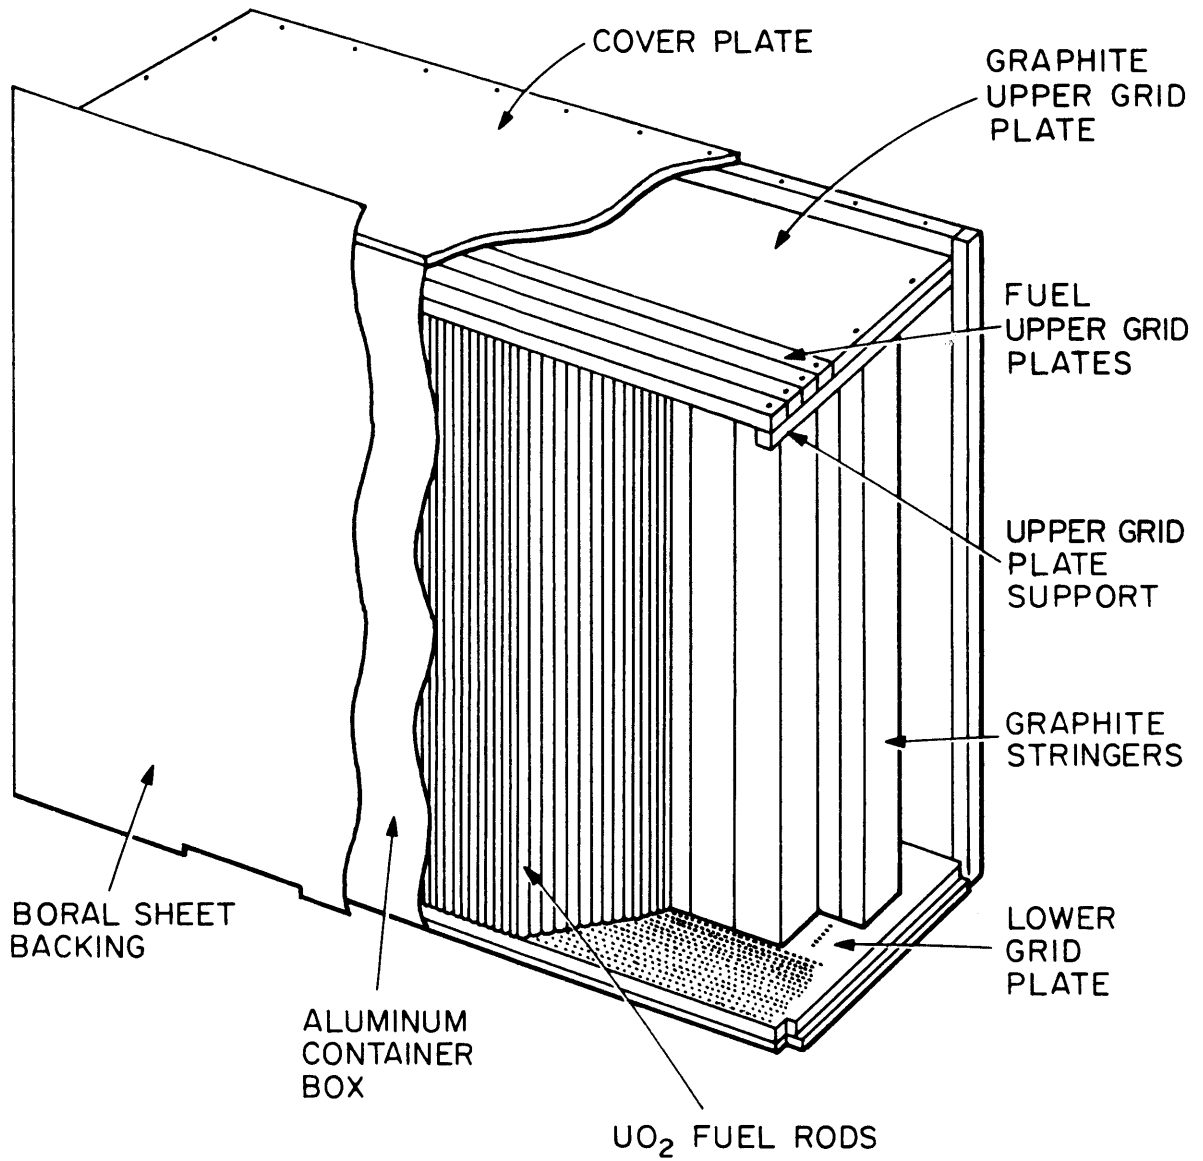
CUTAWAY VIEW OF THE CONVERTER ASSEMBLY.
